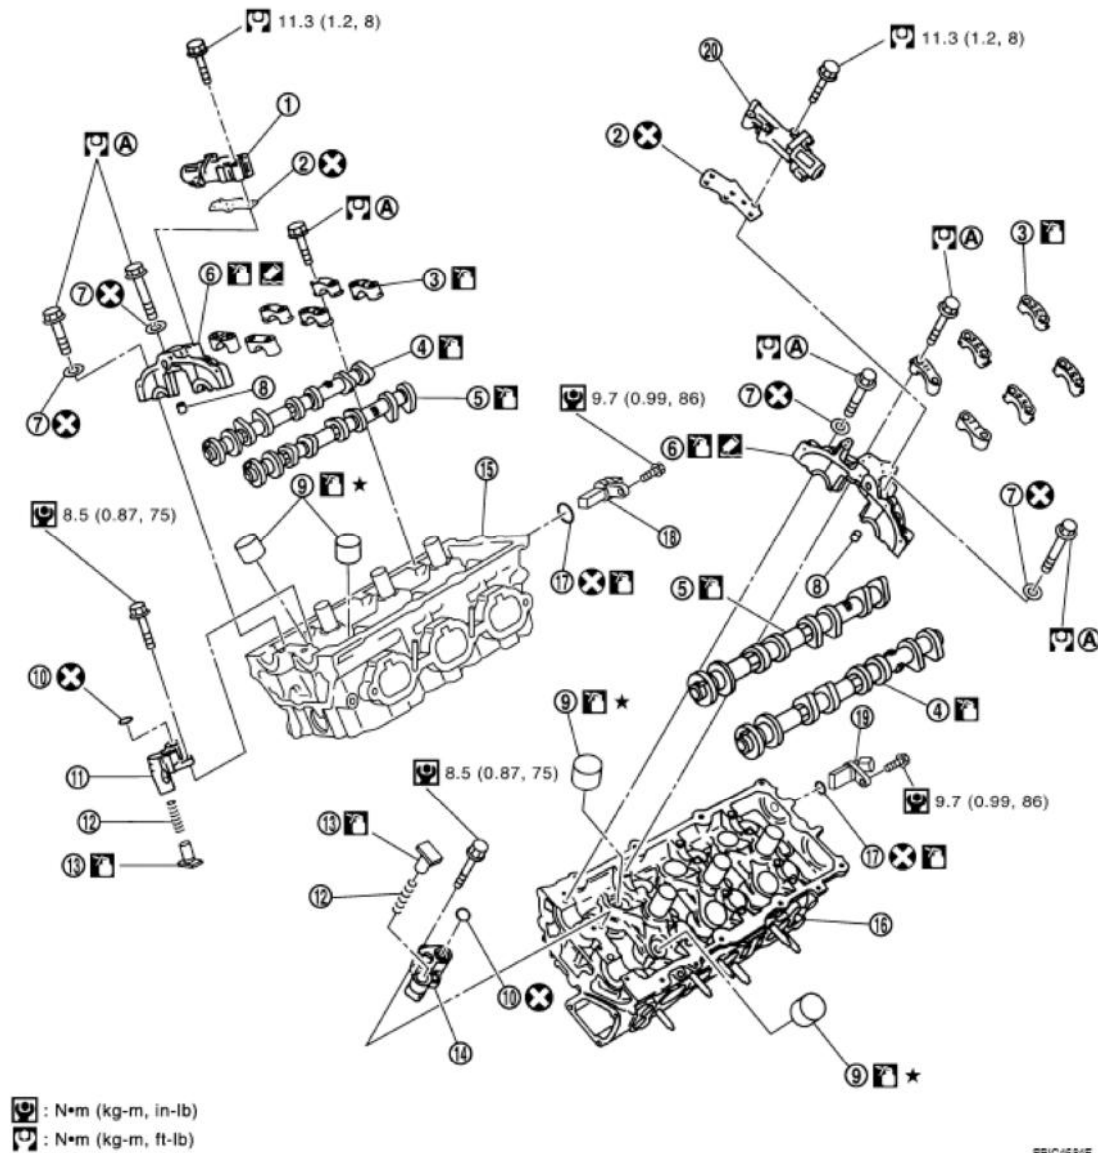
Identifying Exploded View Of Camshaft Components With Torque Specifications
